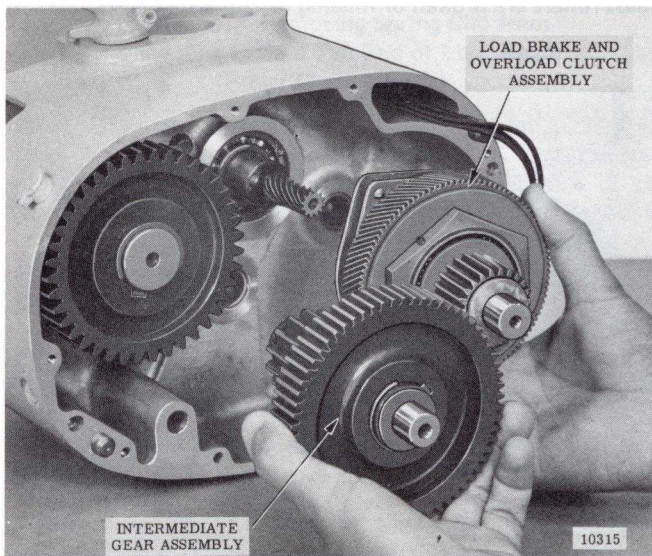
Removing Load Brake and Clutch and Intermediate Gear Subassemblies (1, 2 and 3 ton capacity hoists)
